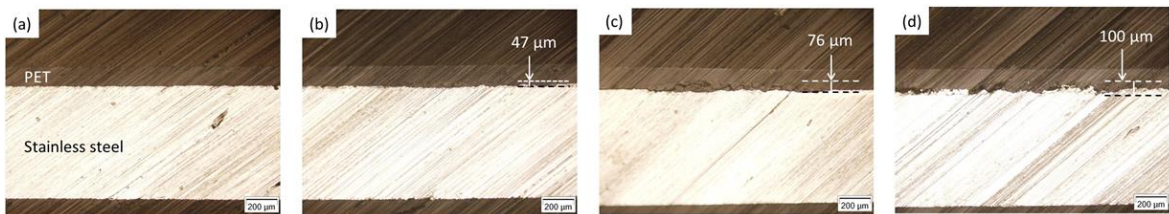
Cross section of welds obtained at different pulse frequency: (a) before laser welding; (b) 60 Hz; (c) 70 Hz; (d) 80 Hz.
